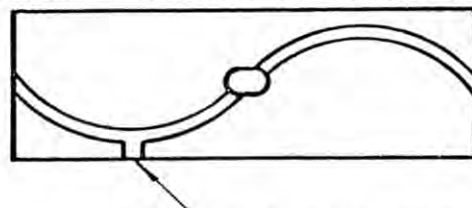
King pin bushings must have lubrication grooves, as shown in this view of bushing before being rolled. Short groove indicated by arrow must face thrust surface of axle.
